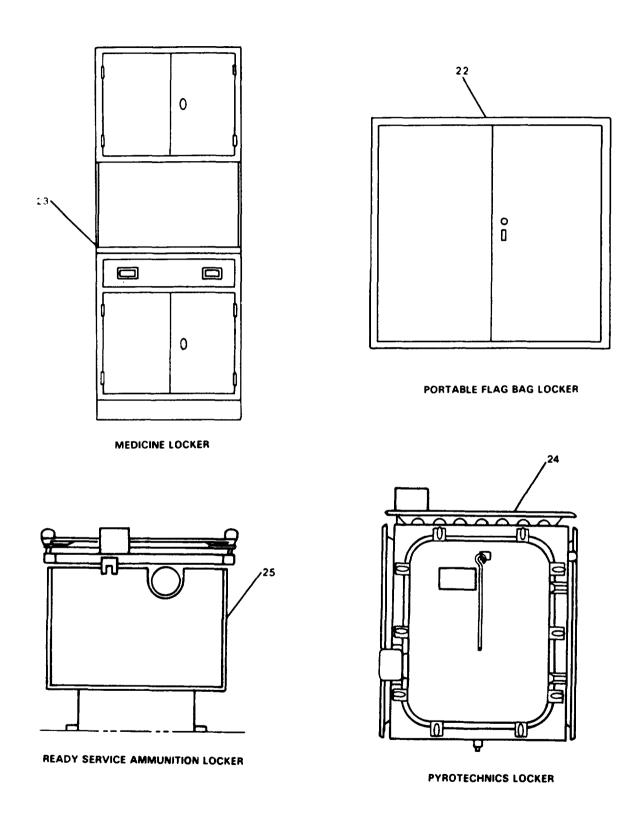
Furniture and Fixtures (Sheet 6 of 14).
